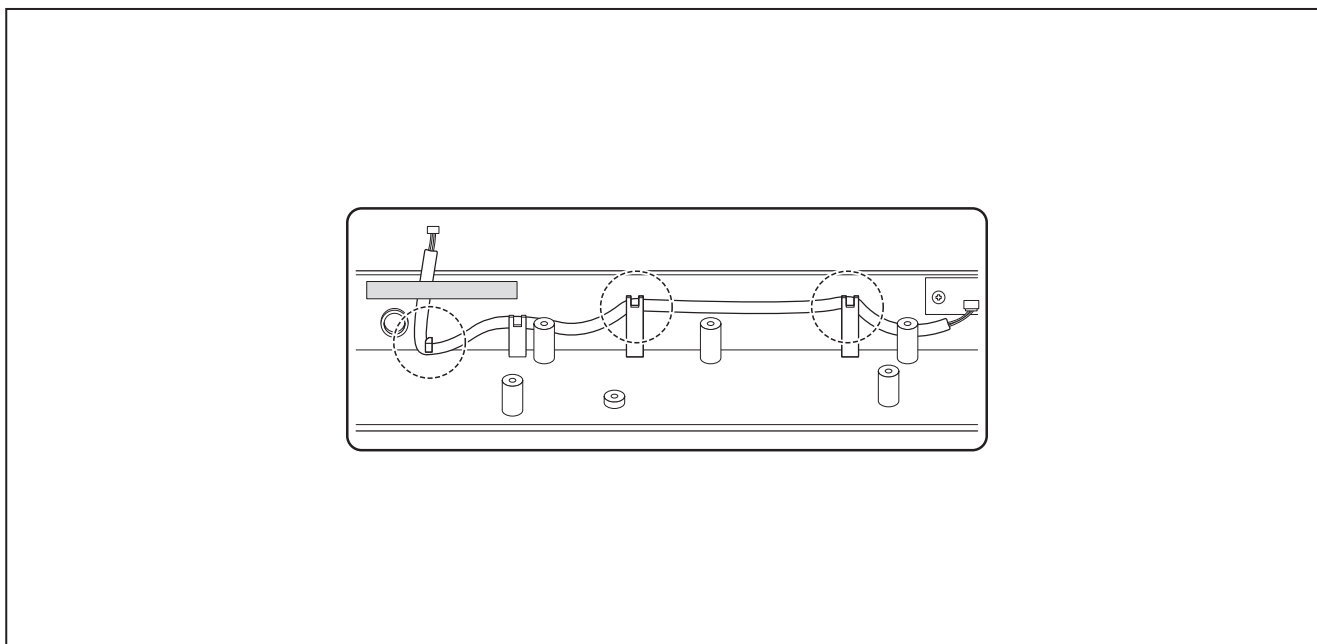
(2). < Harness cable from KEY PCB to MAIN PCB >
